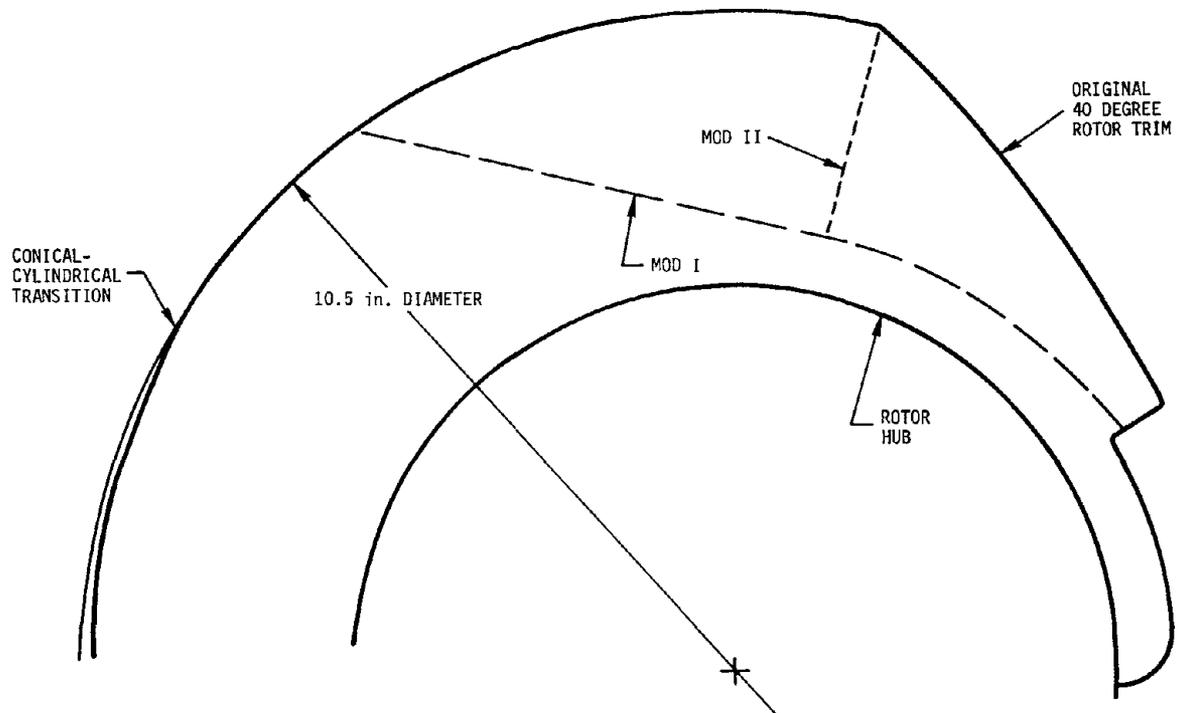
Forty degree rotor trimmings (viewed through coal inlet).
